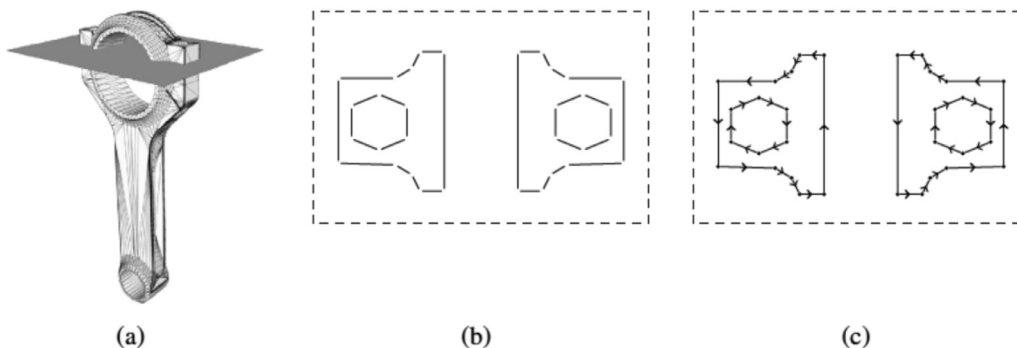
Steps in the additive layered manufacturing process planning: (a) slicing step; (b) contour construction step; (c) path creation step (adapted from [20]).
